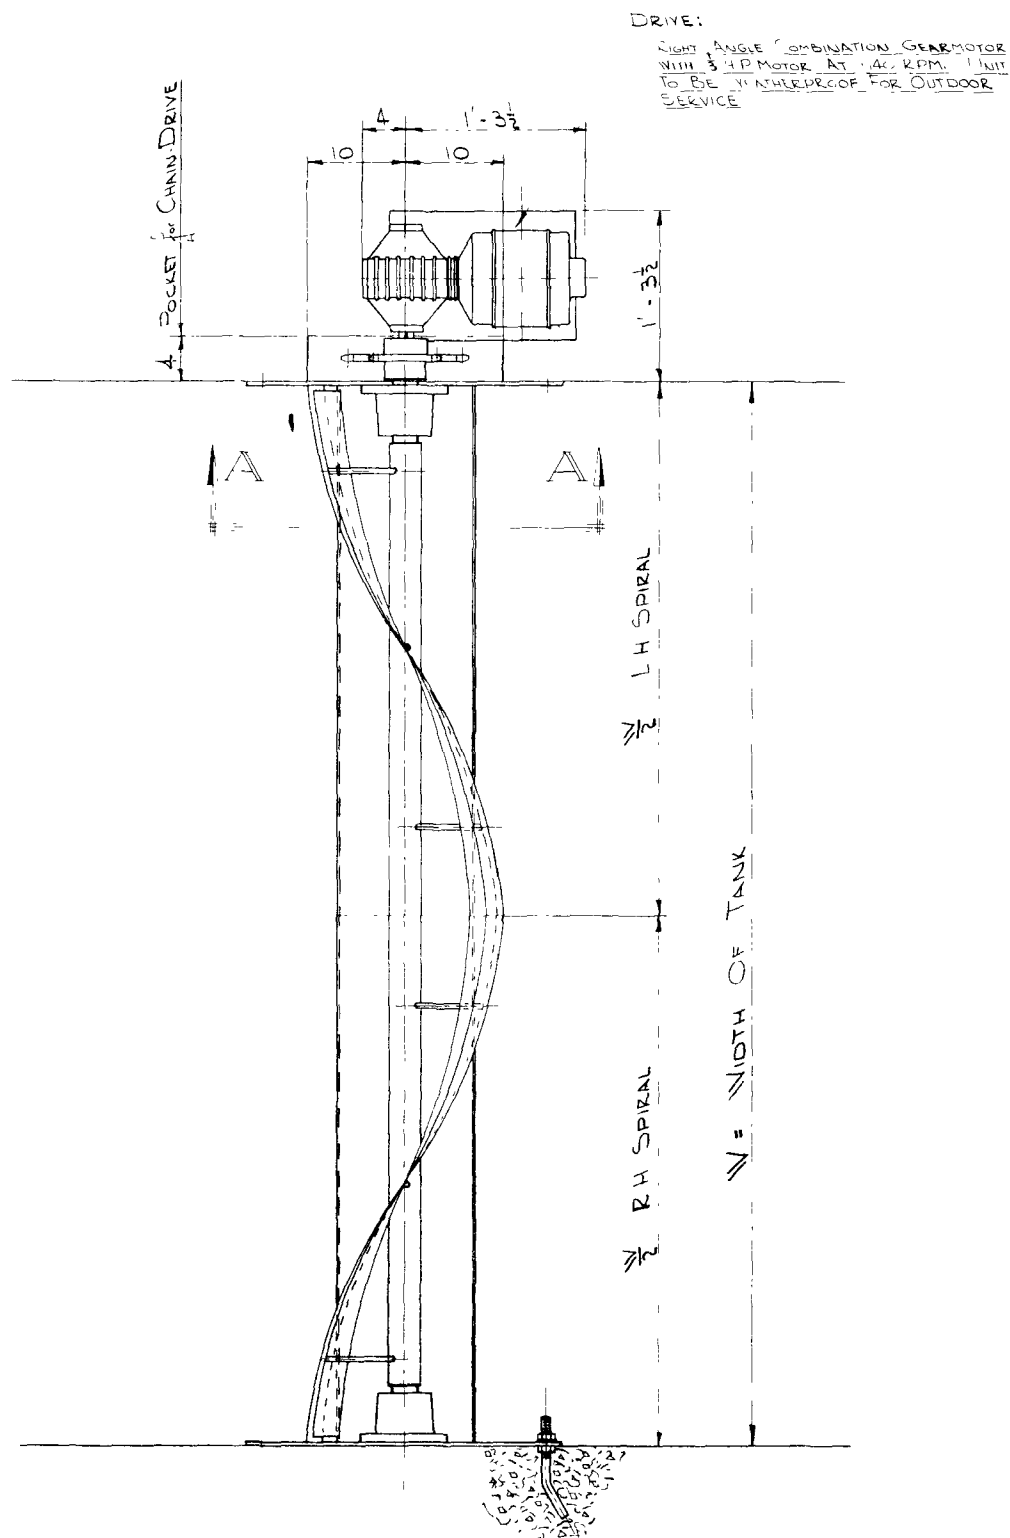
Helical scum skimmer. (Courtesy of the Link-Belt Company.)
